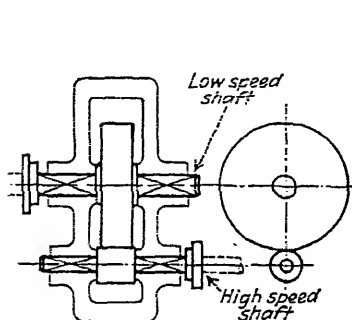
Arrangement of gears in simple single-reduction gear unit.
